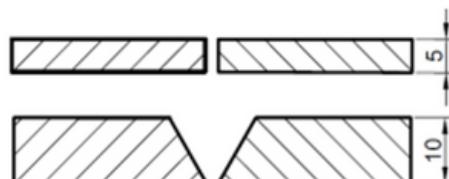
Butt Joint Without Beveling and V-Groove Beveling.
